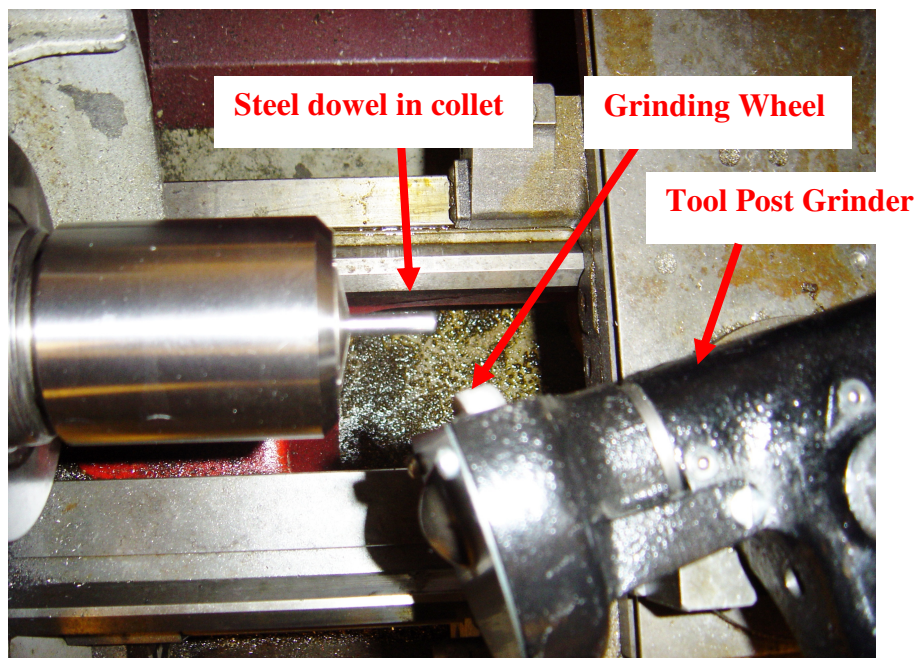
Arrangement for creating sharp-tipped indenters using a lathe and tool post grinder.
